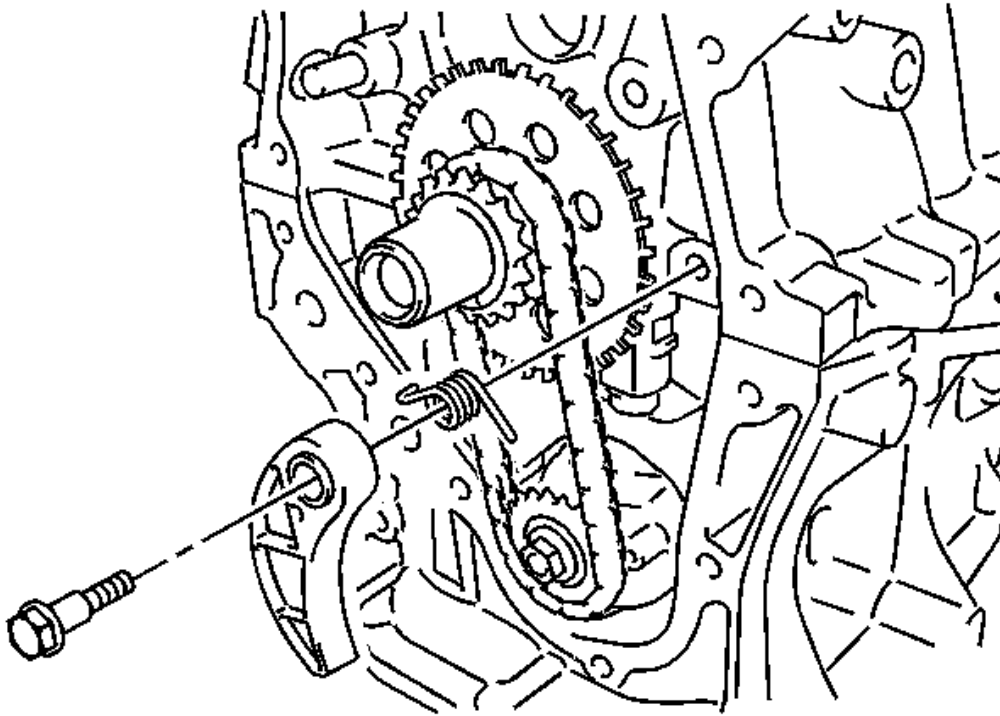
View Of Chain Tensioner Plate, Spring & Bolt
